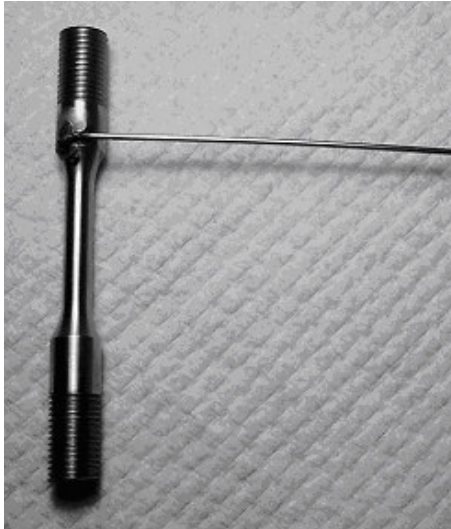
Spot-Welded Tensile Specimen
